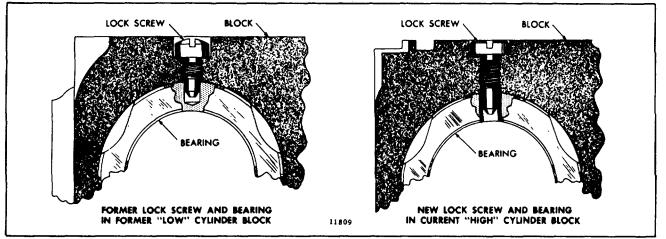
Camshaft Intermediate Bearing Lock Screws
